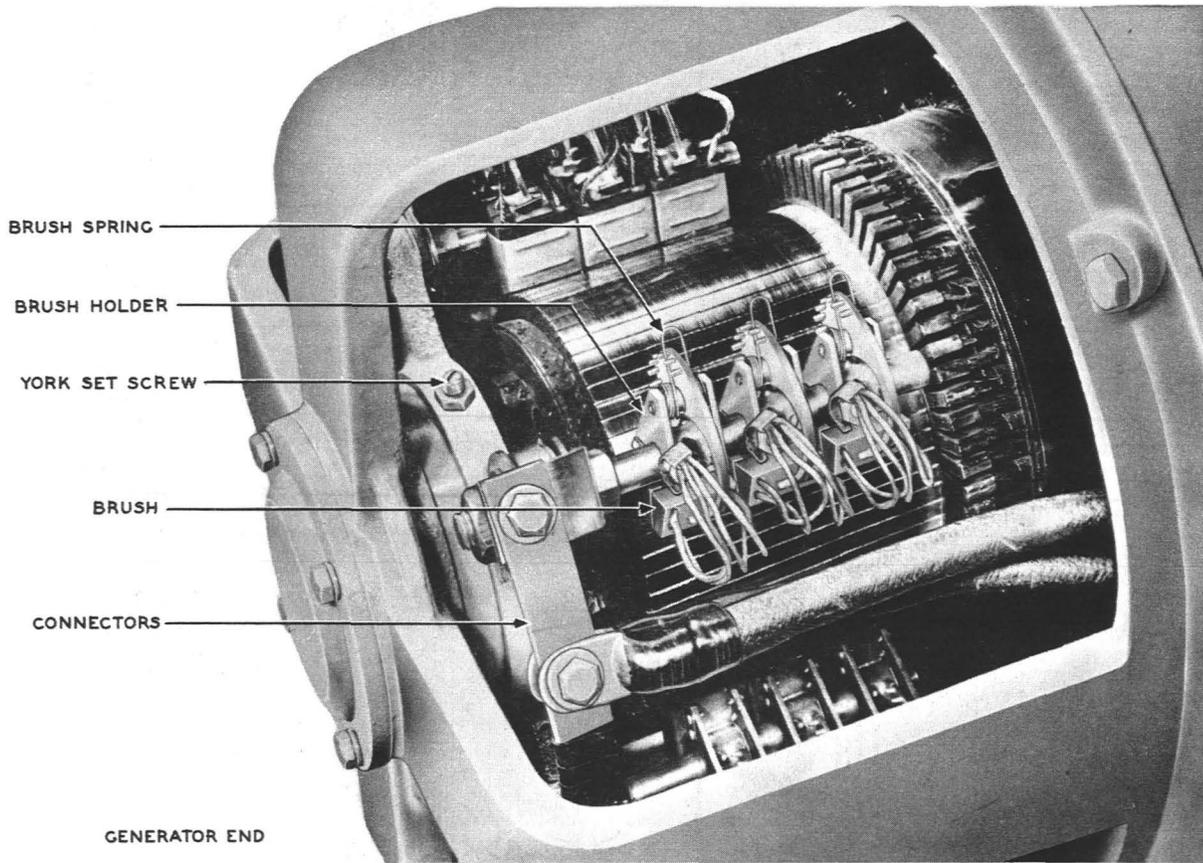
Generator End — Baylis-Type Brush Rigging
